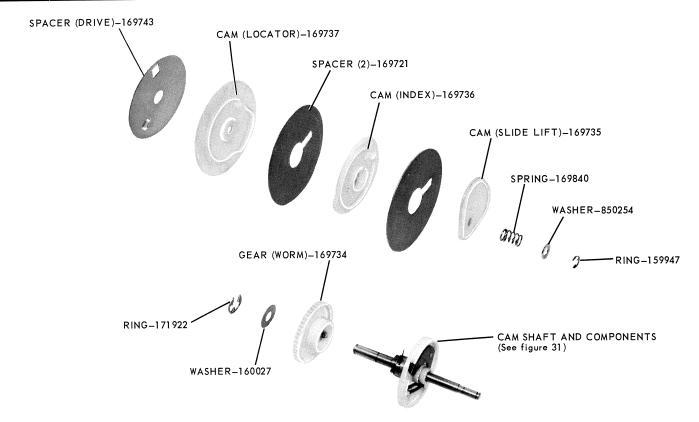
CAM SHAFT ASSEMBLY-170758
